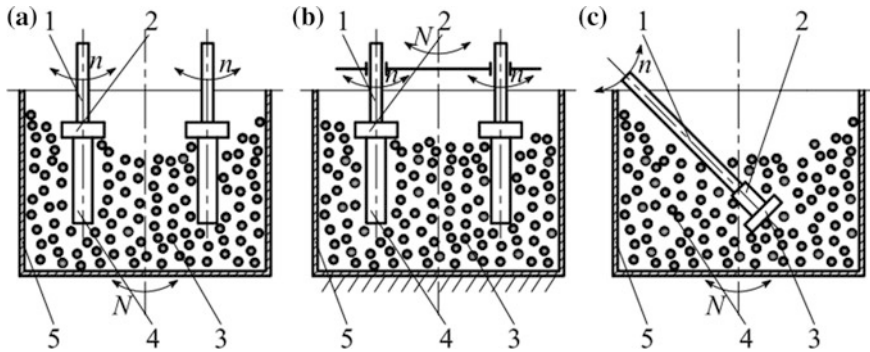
Schematic diagrams of several typical spindle barrel finishing ways. a Parallel spindle type I; b parallel spindle type II; c intermeshing spindle type. 1—Spindle; 2—holding device; 3—medium; 4—parts; 5—barrel
